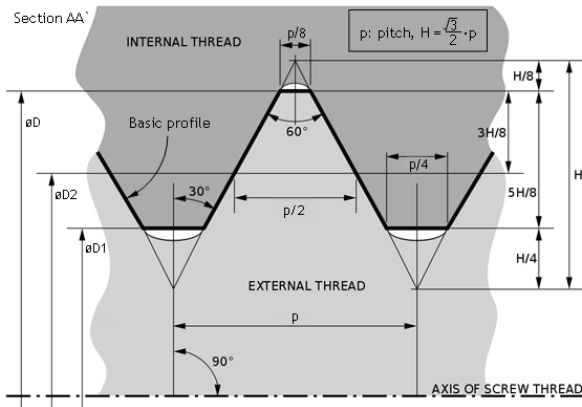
Cross sectional view of ISO metric screw thread after [7].
